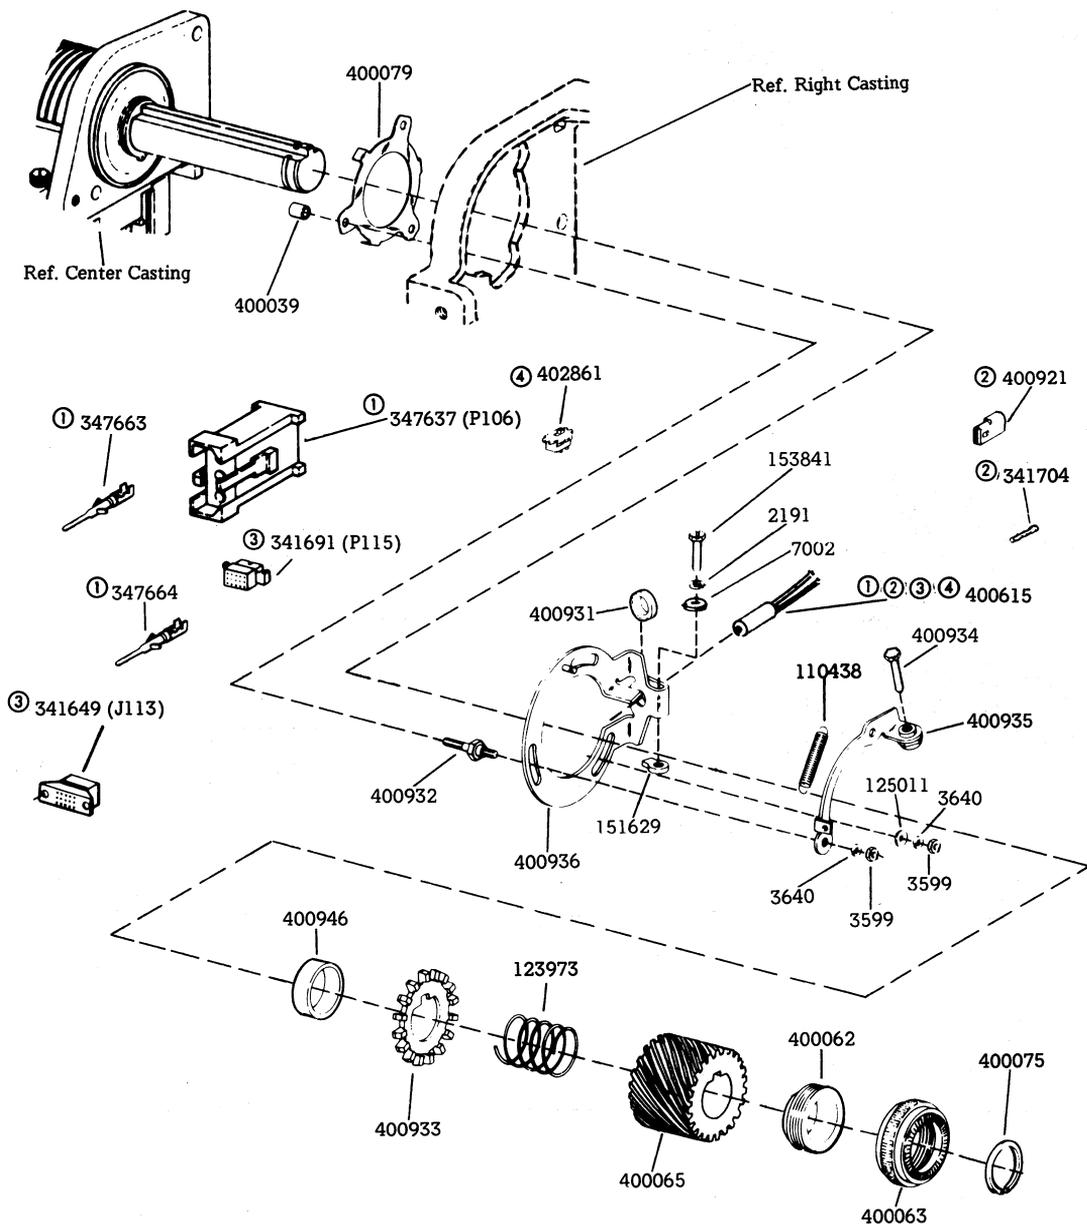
Right Casting Assembly (Tractor Feed - 132-Column)
